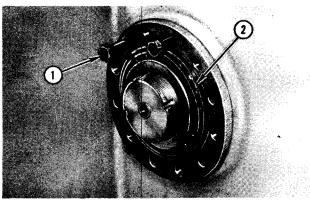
INNER BEARING 1. Capscrews 2. Bearing
